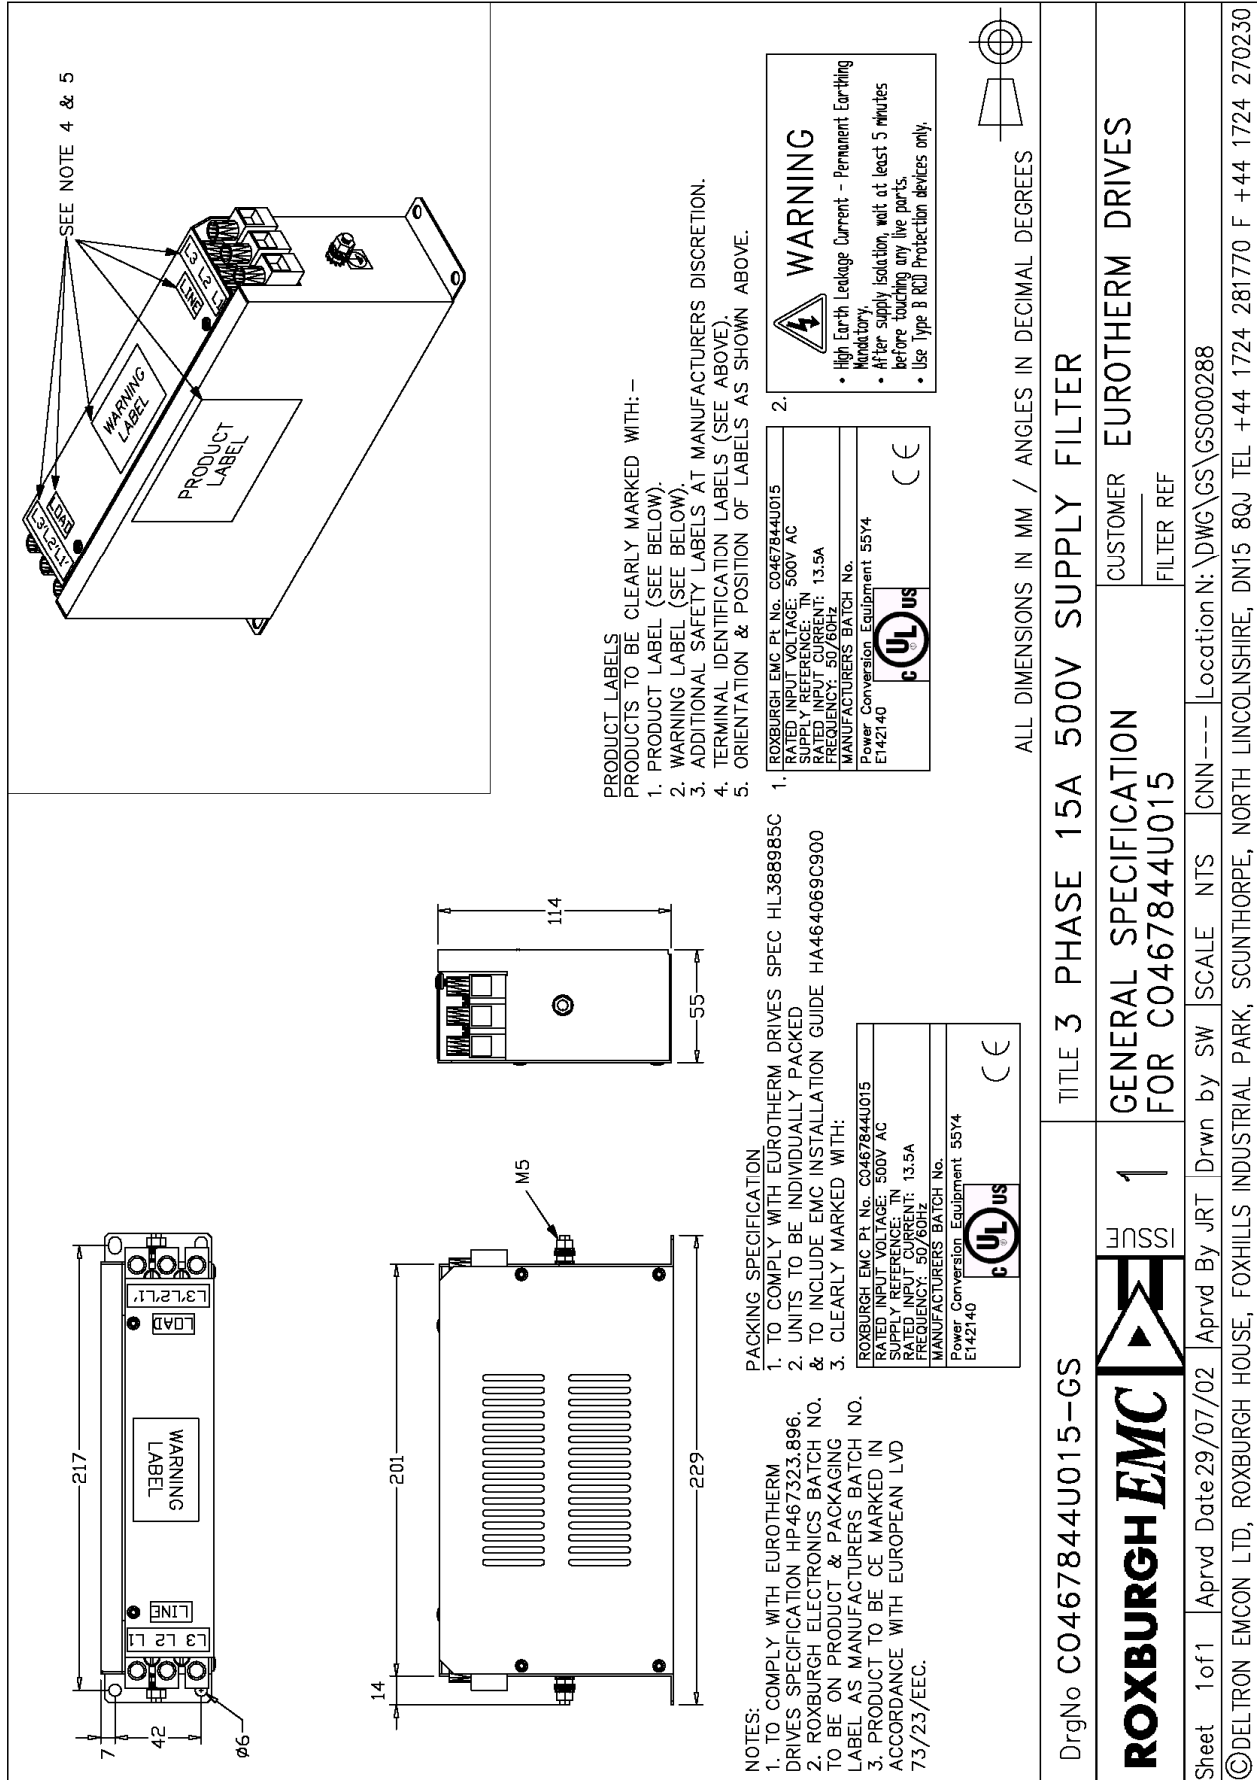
Filter Mounting Details, Part No. CO467844U015 for Frame 1 : 15 Amp
